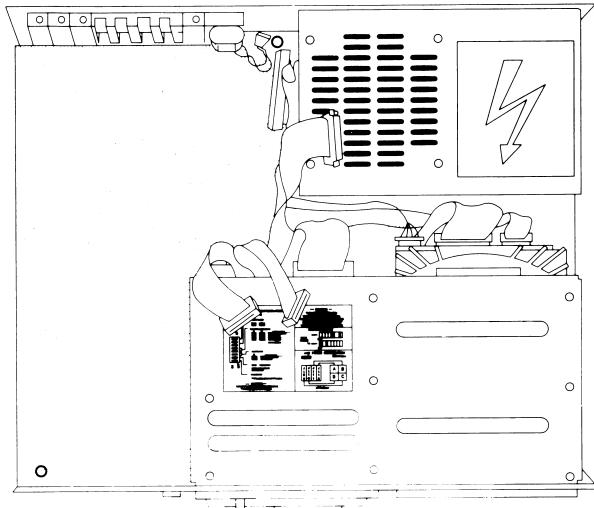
Placement of Retaining Screws on the COMPAQ DESKPRO System Board.
